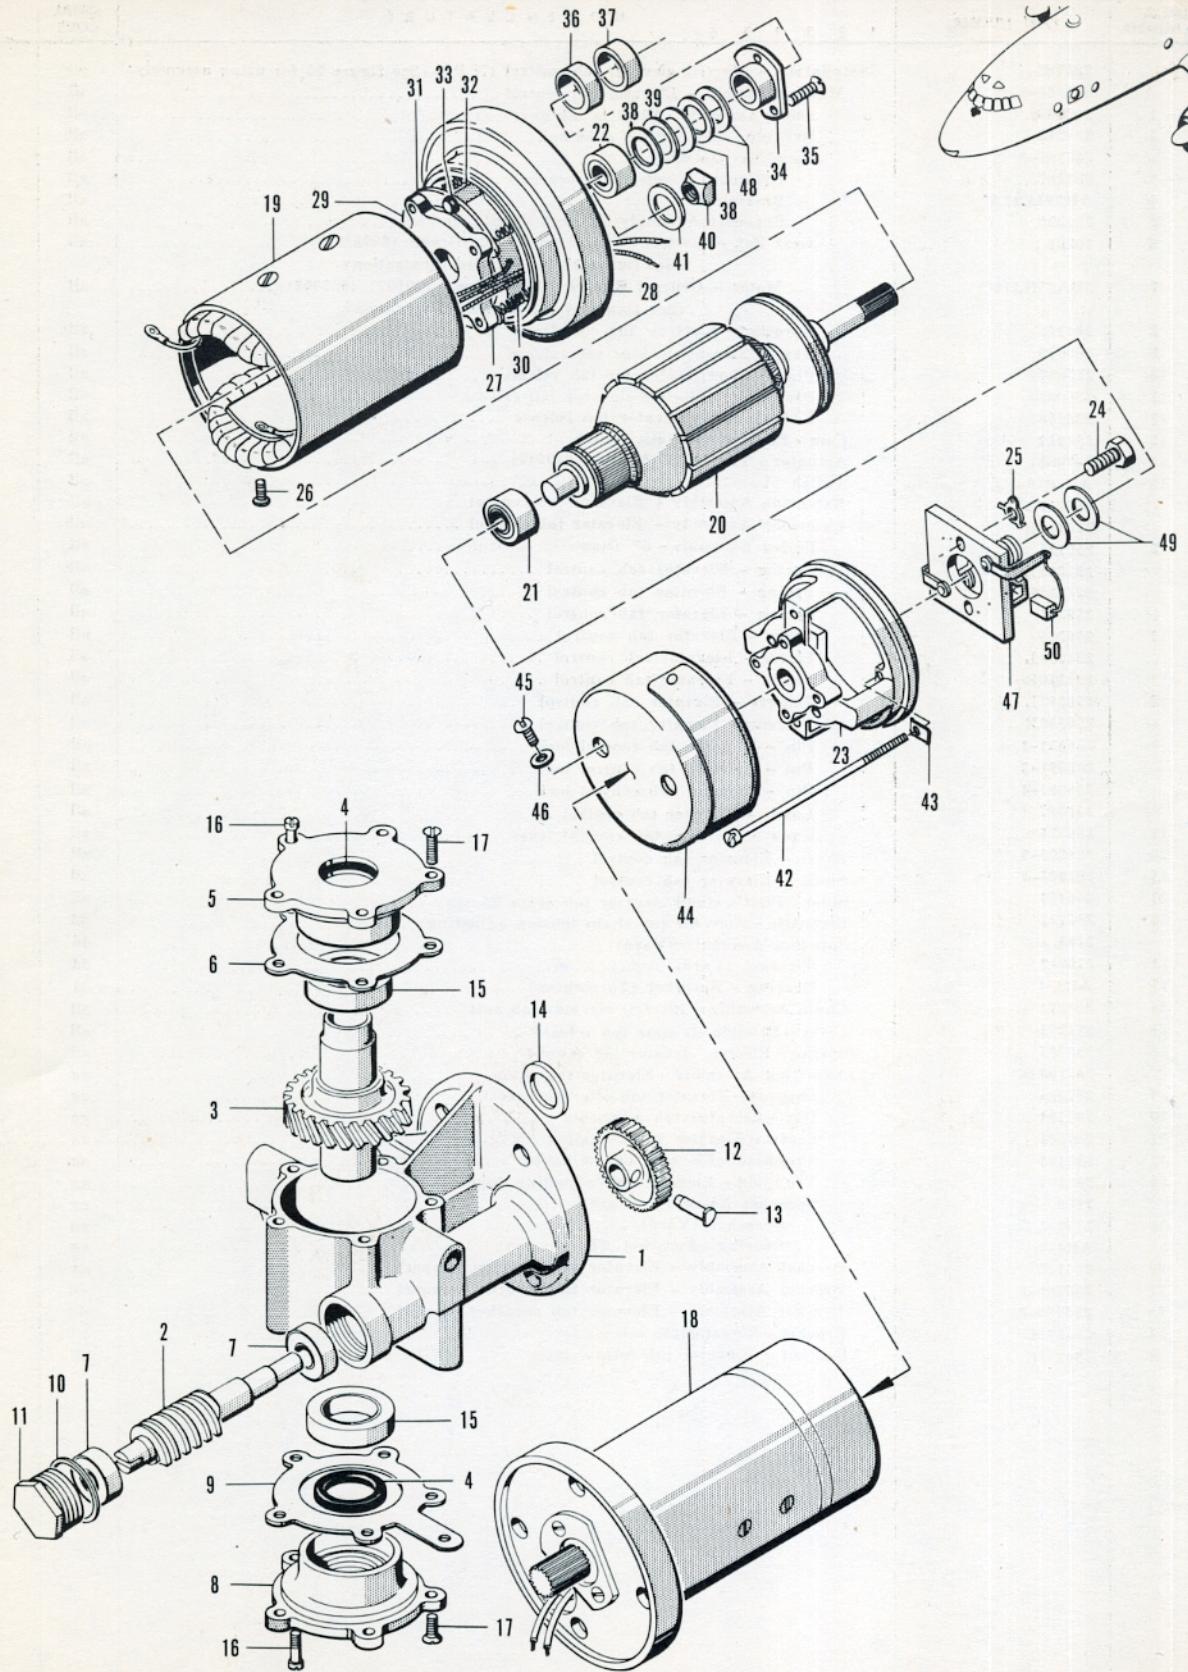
Gear Box and Motor—Electric Elevator Tab Control
